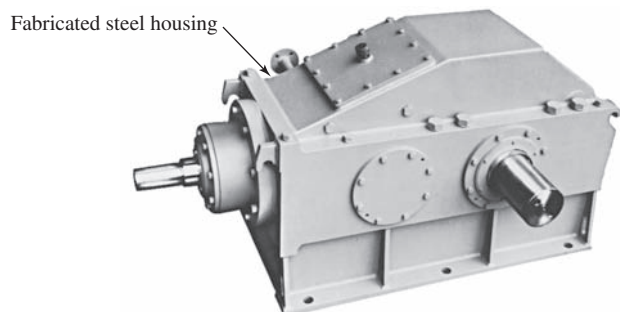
Heavy-duty right angle gear reducer (Sumitomo Machinery Corporation of America, Teterboro, NJ)
